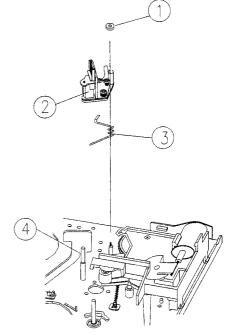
DISASSEMBLY OF THE AC HEAD ASS'Y
